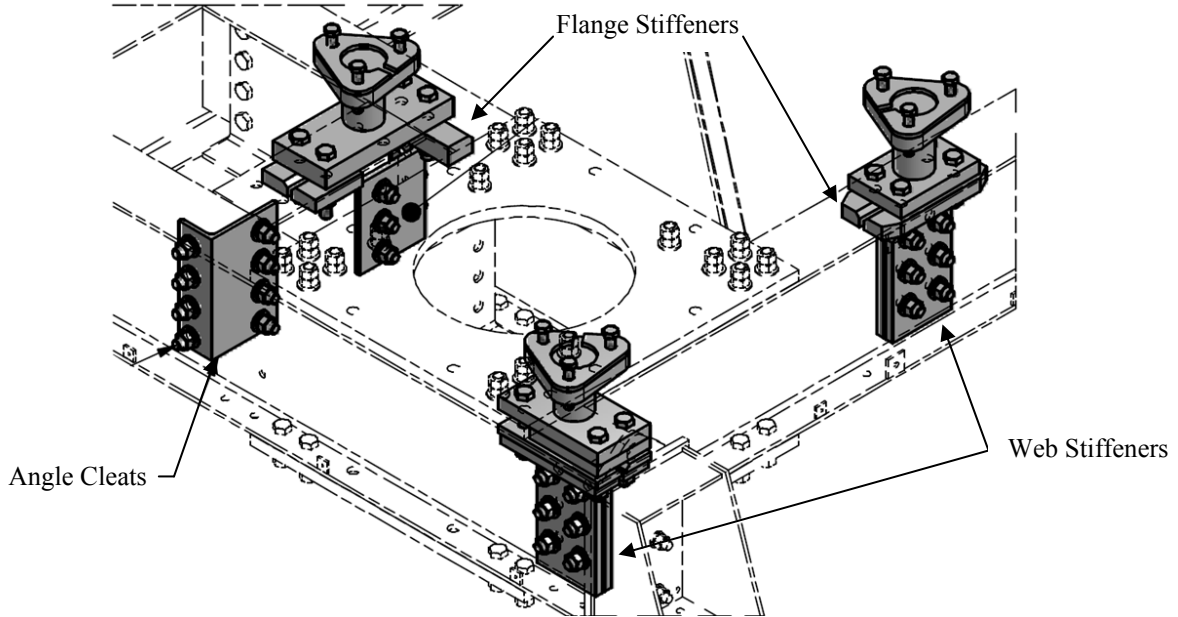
3D View of Stub, Angle Cleat and Stiffener Layout
